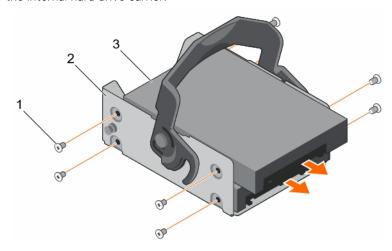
Removing the (optional) 2.5 inch internal hard drive from the internal hard drive carrier
